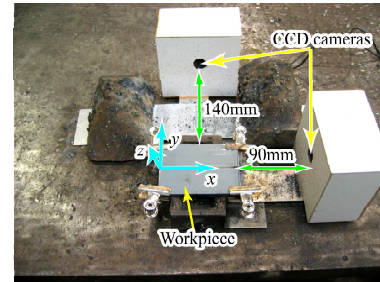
Devices for measurement of electrode tip position in actual welding
